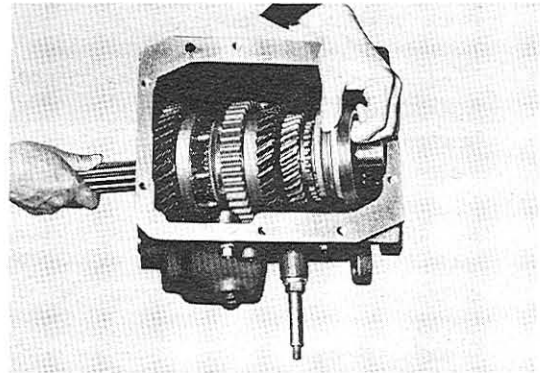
Installing Output V5068 Shaft & Gear Assembly
